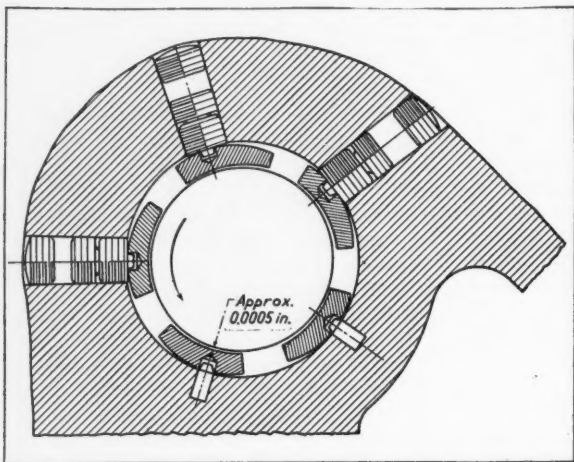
Drawing Showing Construction of Filmatic Bearing. Rotation of spindle creates wedge-shaped oil films which develop high radial pressures, forcing the spindle into a central position.
